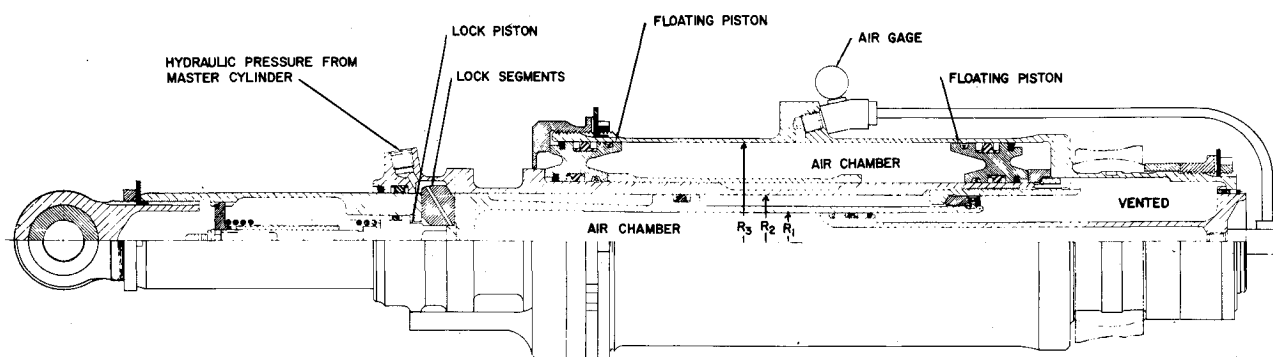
C-5A main landing gear bogie pitch positioner design.
